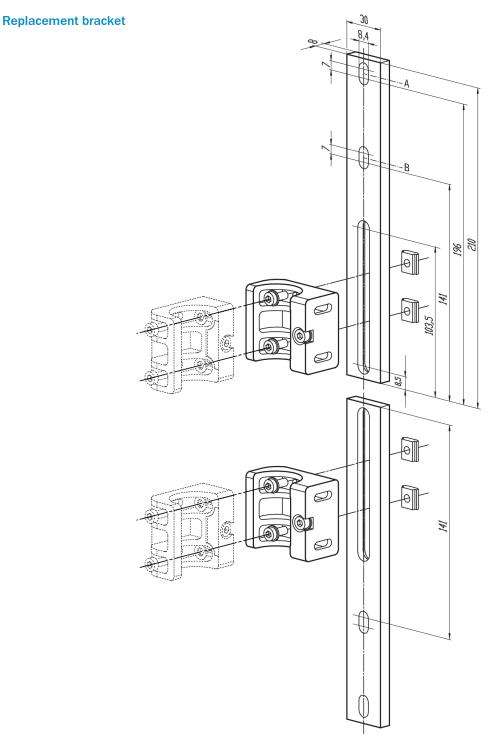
Dimensional drawing of the replacement bracket (2071021)
